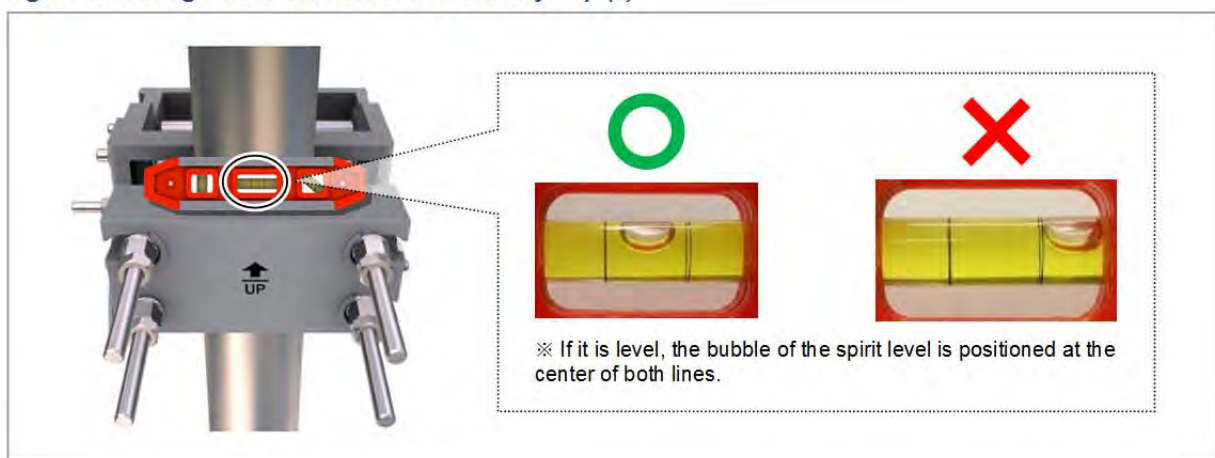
Fixing Pole Mount Bracket Assembly-Top (5)
